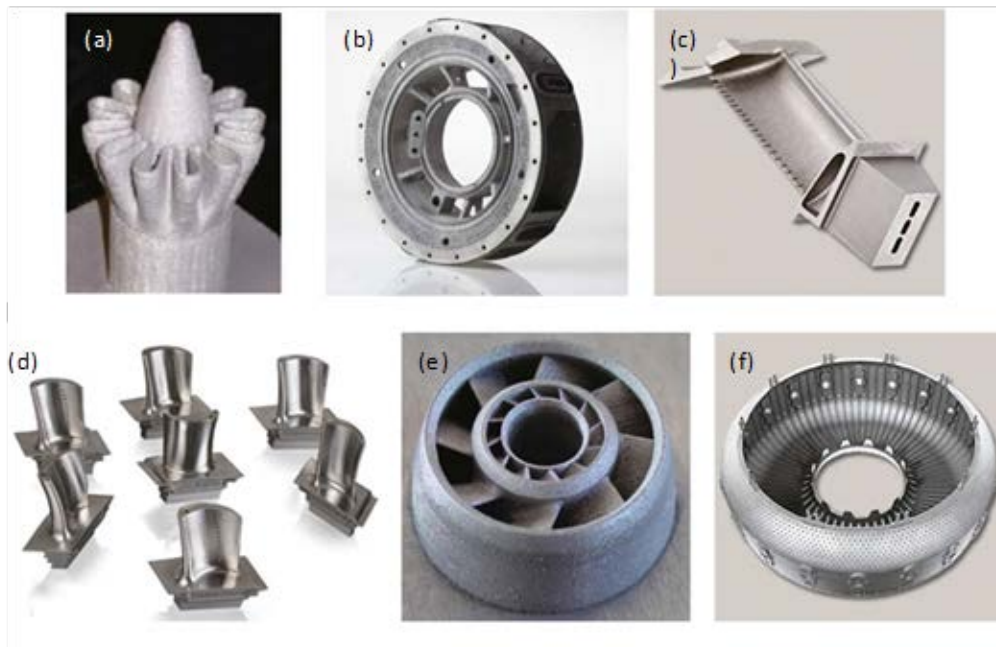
(a) Mixing nozzle for gas turbine exhaust produced by DED-LENS by Optomec, (b) compressor support case produced by PBF-EBM by Arcam, (c) turbine blade produced by PBF-SLM by Concept Laser, (d) turbine blades fabricated by PBF-SLM by Morris Technologies
